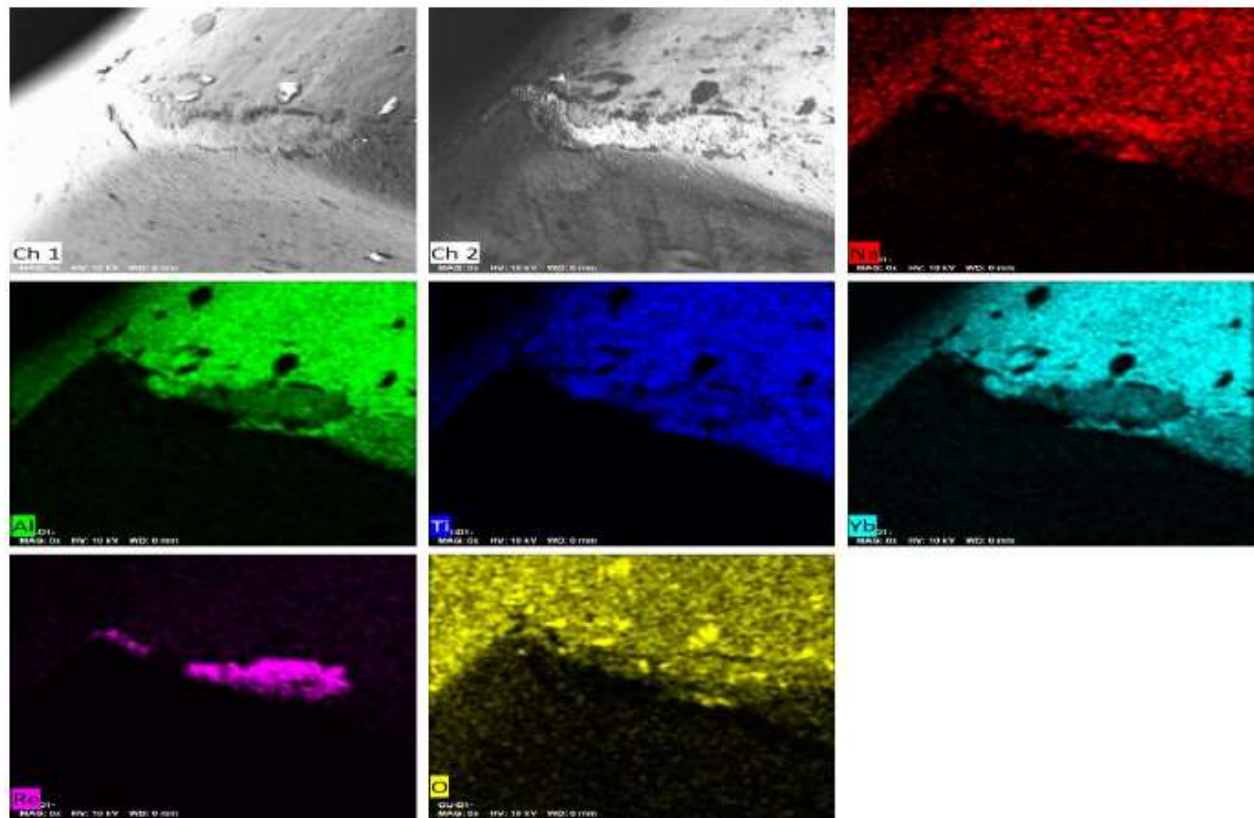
Elements in plain carbide drill insert after machining the 3D C/C composite.
